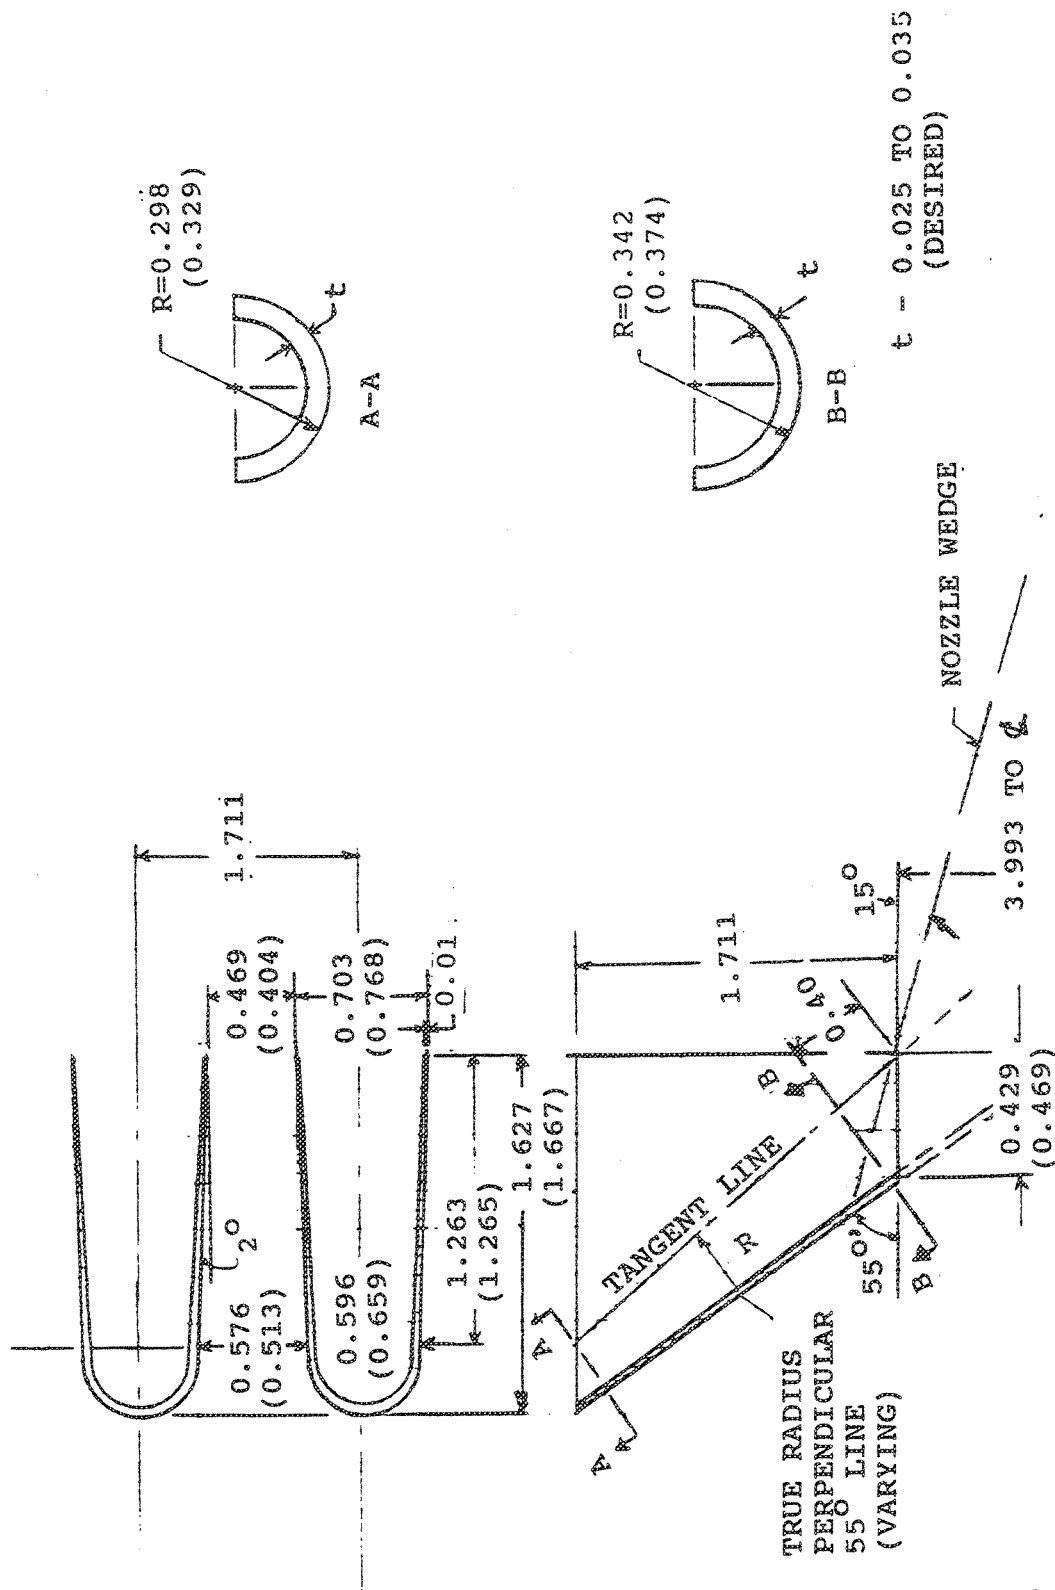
Chute design details of the suppressor for aero-mixing fluid shield nozzles; chute depth/height = 1, for SAR = 2.5 (model #1) and 2.9 (model #3, dimensions in parenthesis), all dimensions are in inches.
